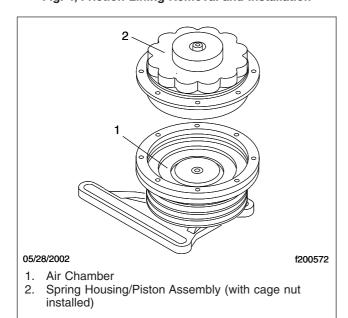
, Spring Housing/Piston Assembly Removal and Installation
